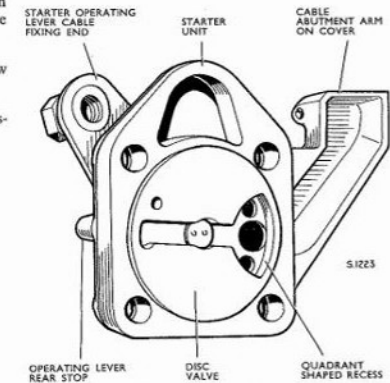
The starter unit, showing the correct re-assembly position of the disc valve in relation to the starter operating lever
